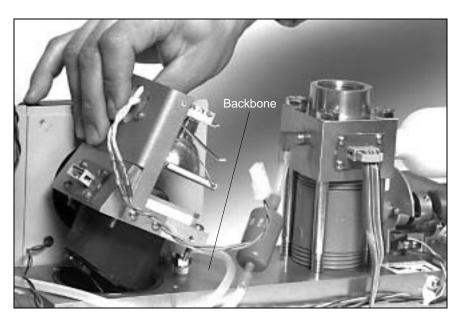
Removing the Lamp Base Assembly From the Sensor
